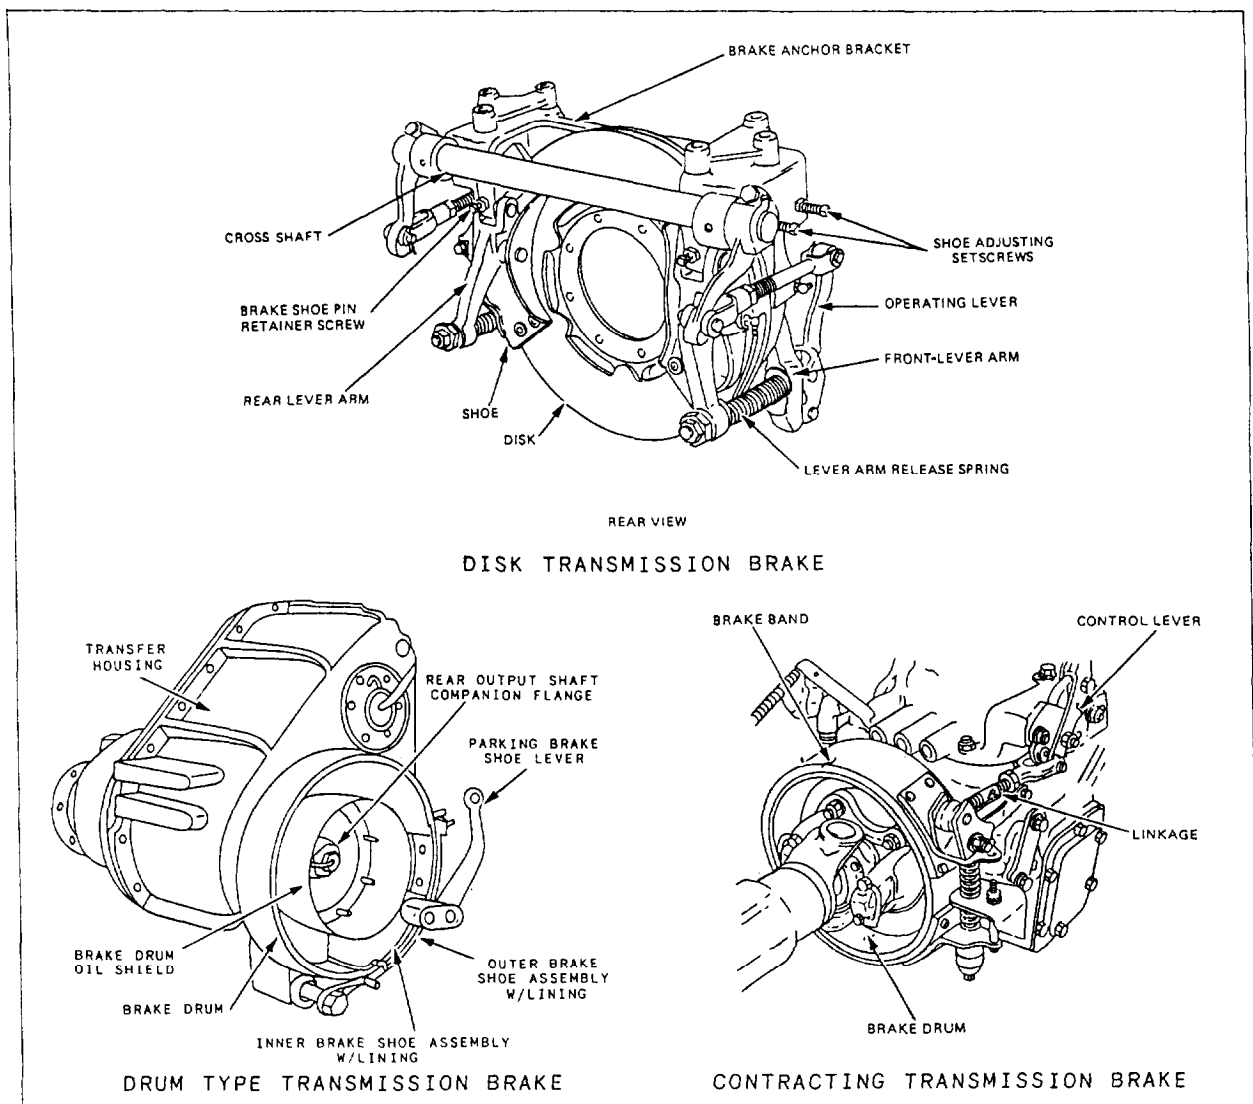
Examples of drive line emergency/parking brakes, transmission mounted.
